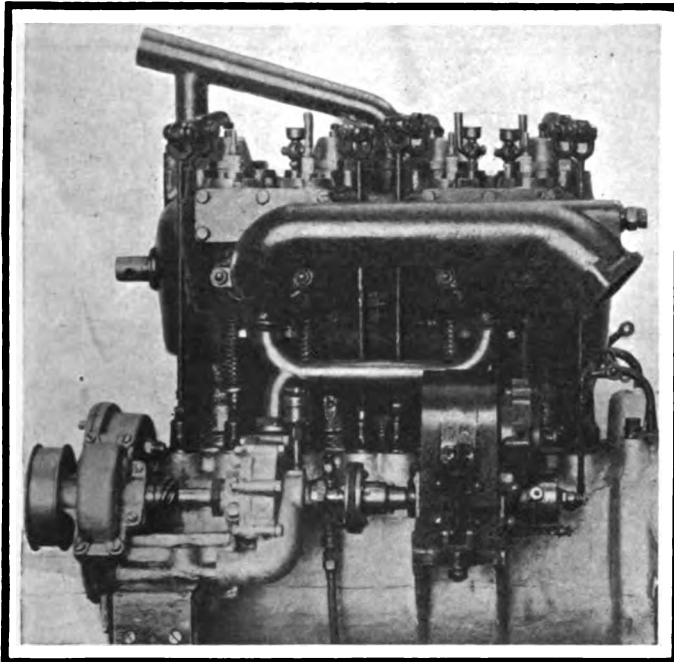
Exhaust side of Chalmers 30 four-cylinder motor
